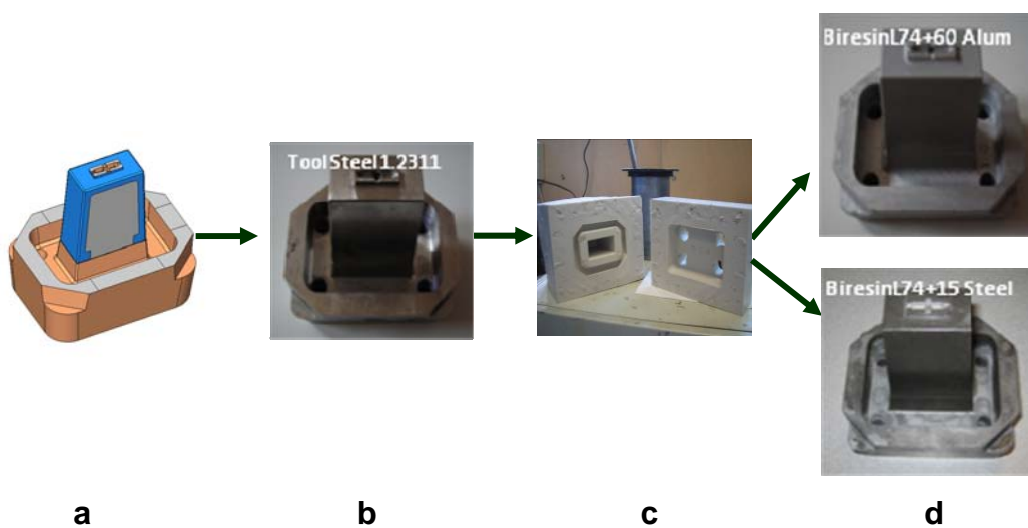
Phases of the epoxy tooling process: a) CAD model, b) steel master, c) silicone moulds, d) Epoxy composite blocks
